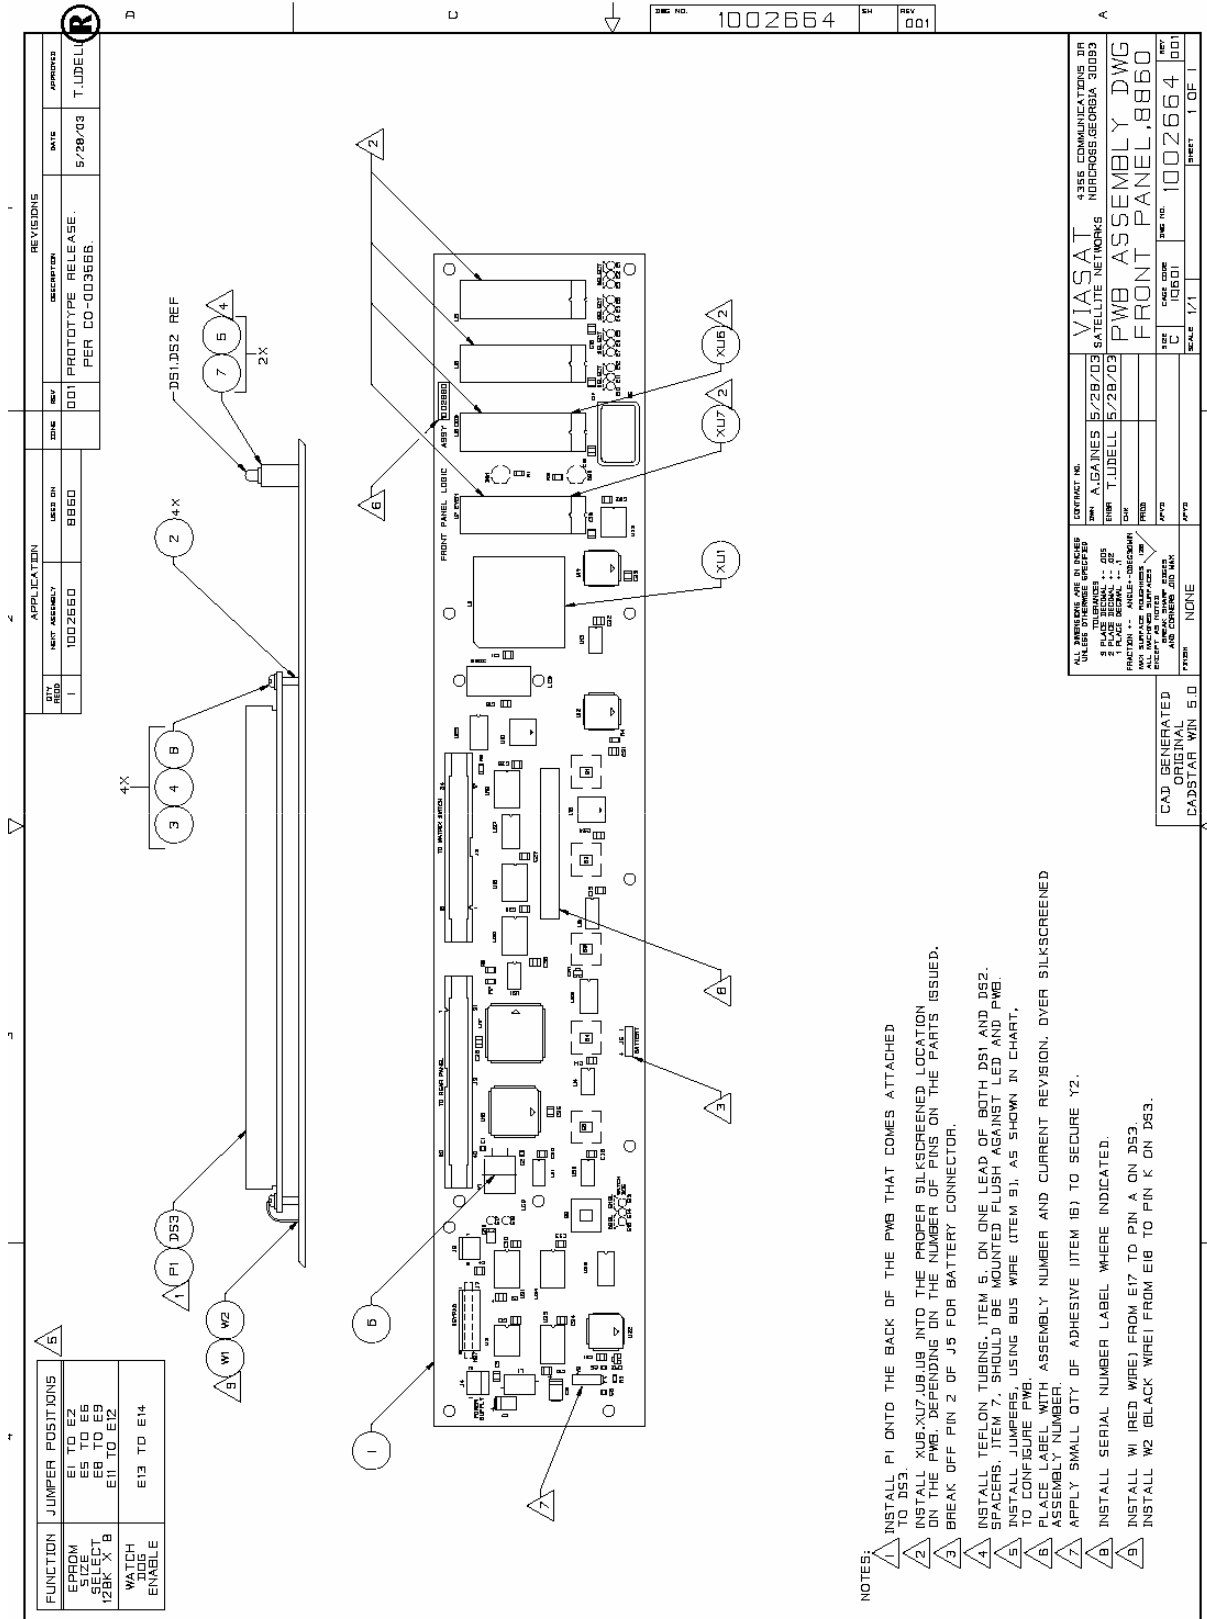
Front Panel Control Board Assembly Diagram, 1002664
